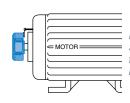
Shaft mounted on totally enclosed non-ventilated motor.
